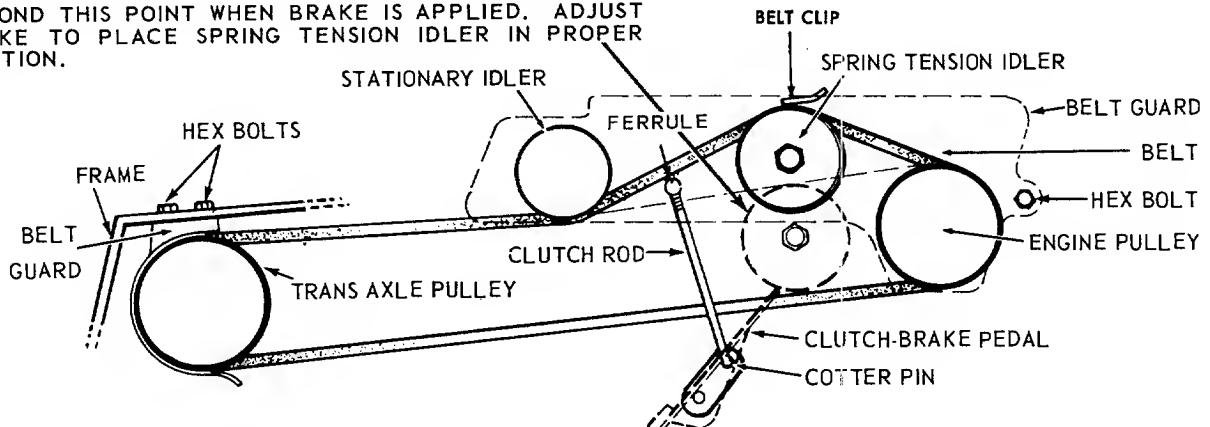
CLUTCH-BRAKE PEDAL ADJUSTMENT
